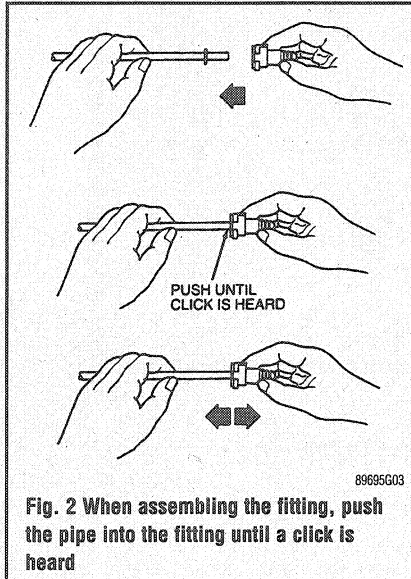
When assembling the fitting, push the pipe into the fitting until a click is heard
